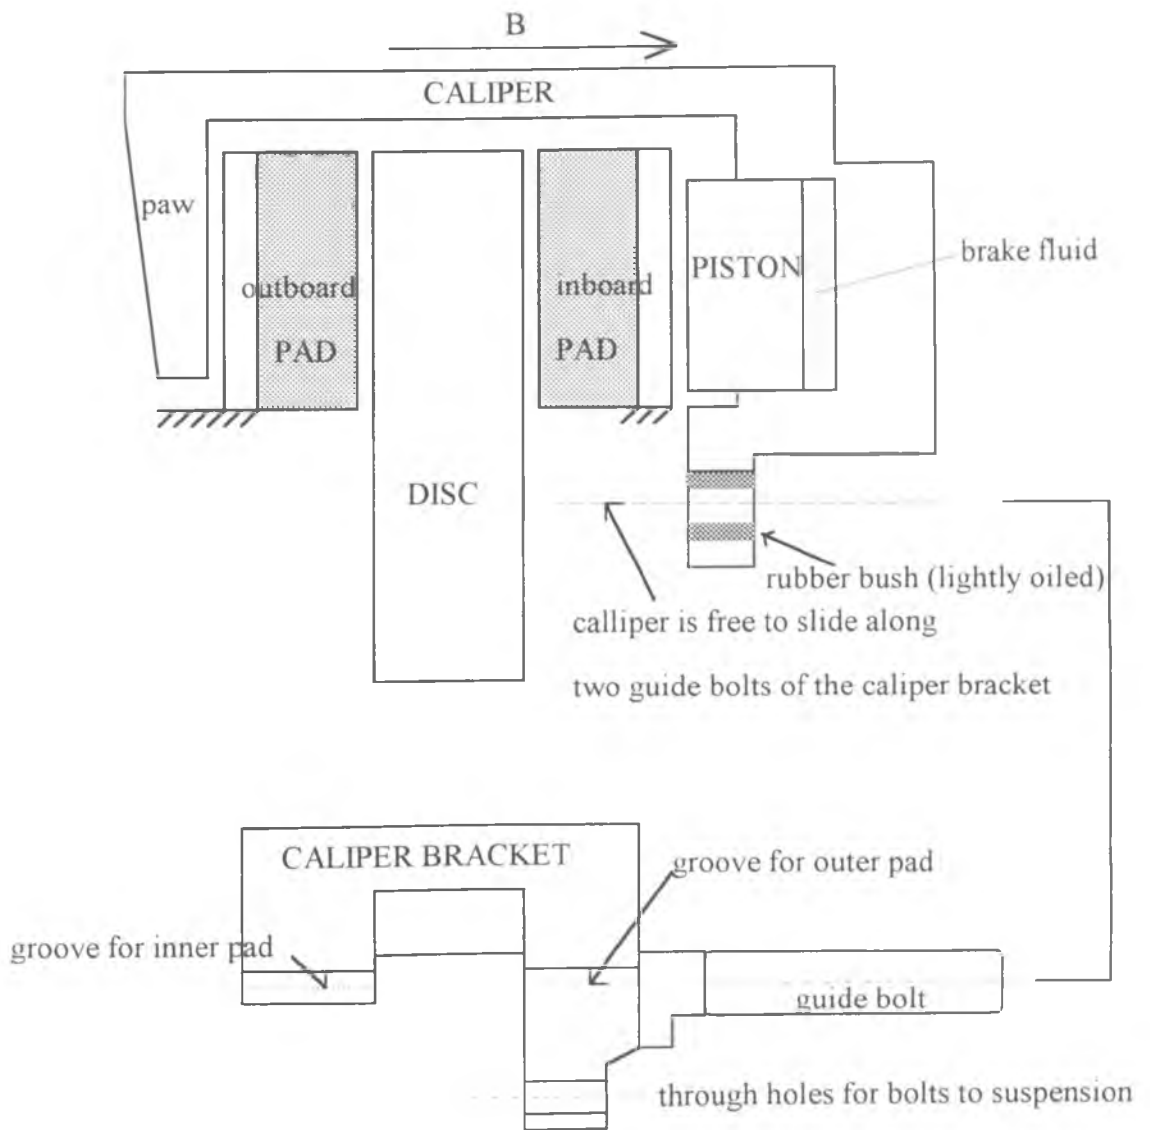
Schematic diagram of the operation of the sliding caliper disc brake.
